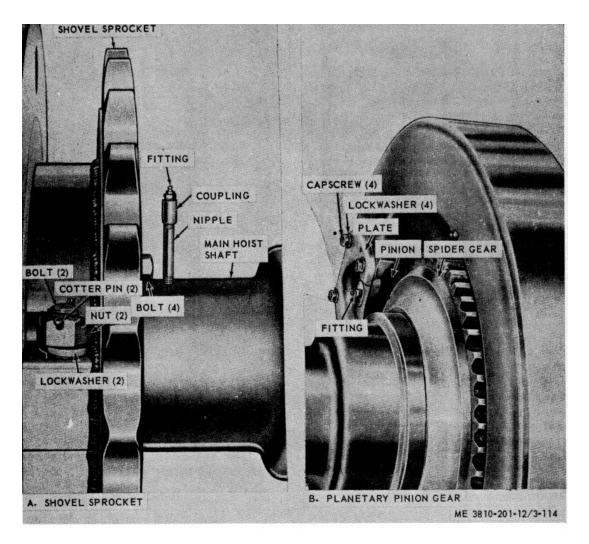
Shovel sprocket and planetary pinion gear, removal and installation.
